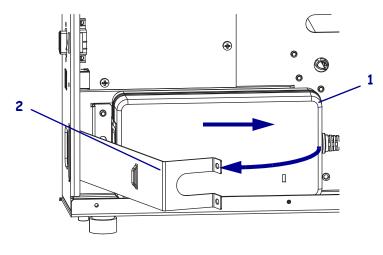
• Remove the Upper Power Supply Mounting Bracket
